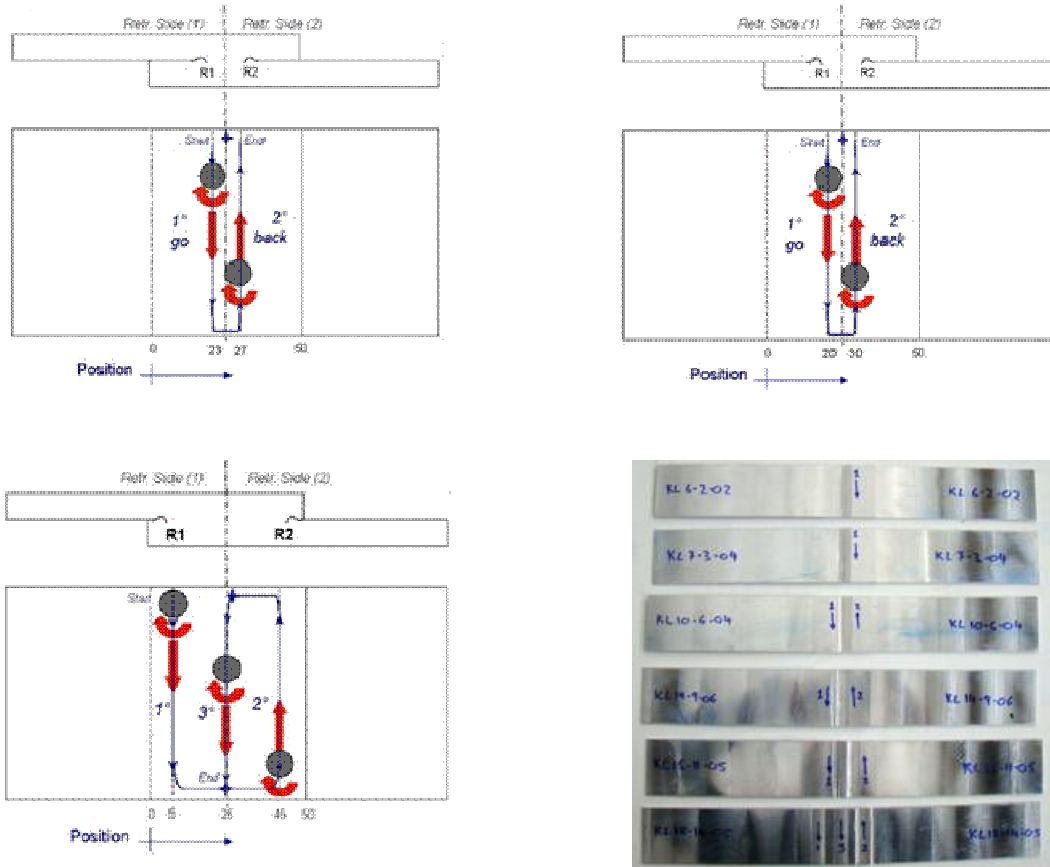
Weld types tested in WP4.1 by University of Patras
